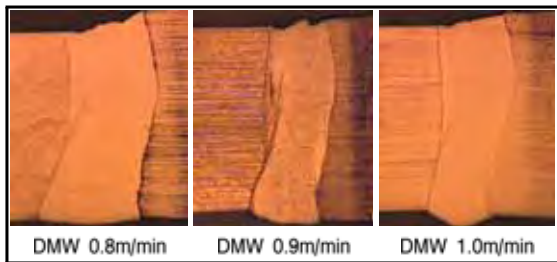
(b) Influence of Welding on the bead shape(SM45C)
